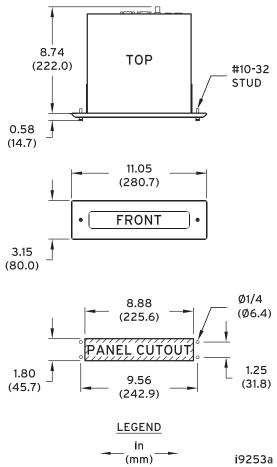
SEL-3530-4 Panel-Mount Dimensions
